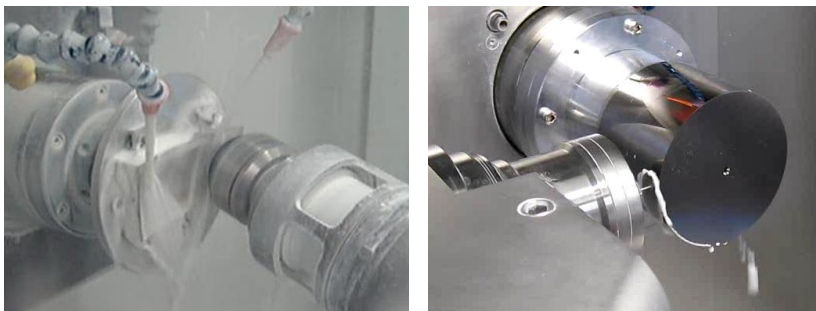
Bonnet (left) and fluid jet (right) polishing on 7-axis CNC machine.
